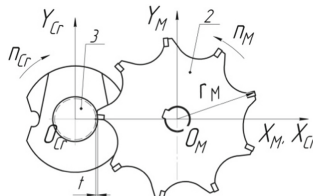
The scheme of milling of radical necks of a cranked shaft.
